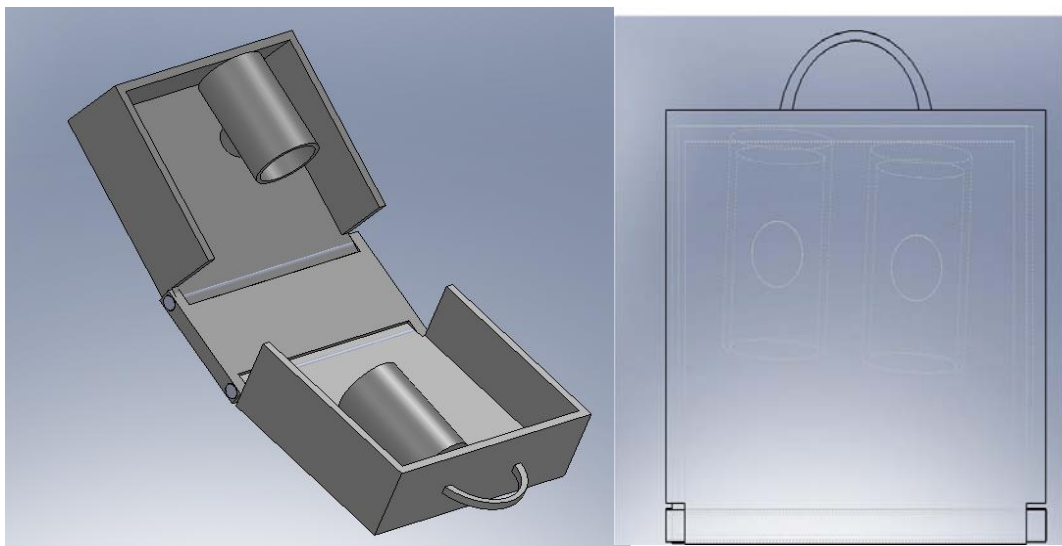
Open and close view second sketch designs on how the beverage can cooler is going to look like.
